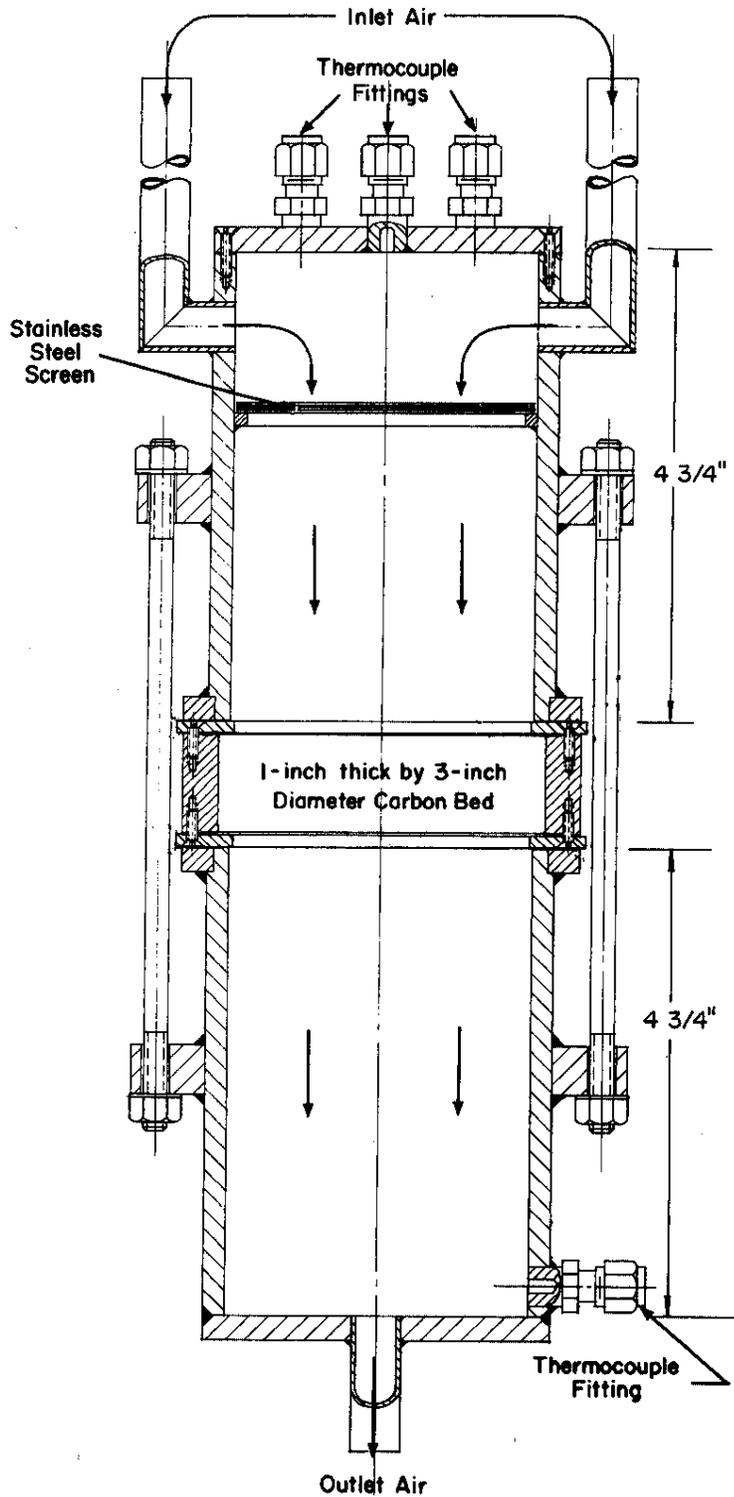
DETAILED DRAWING OF SMALL-SCALE IGNITION APPARATUS
